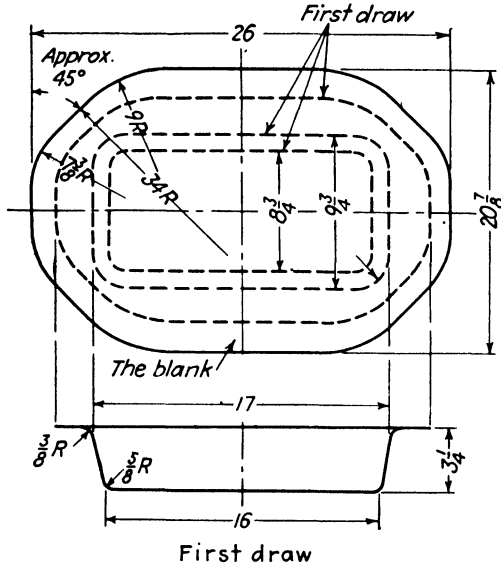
First draw of a container produced in the double-action die shown in Fig. 185. The blank is of deep-drawing steel.
